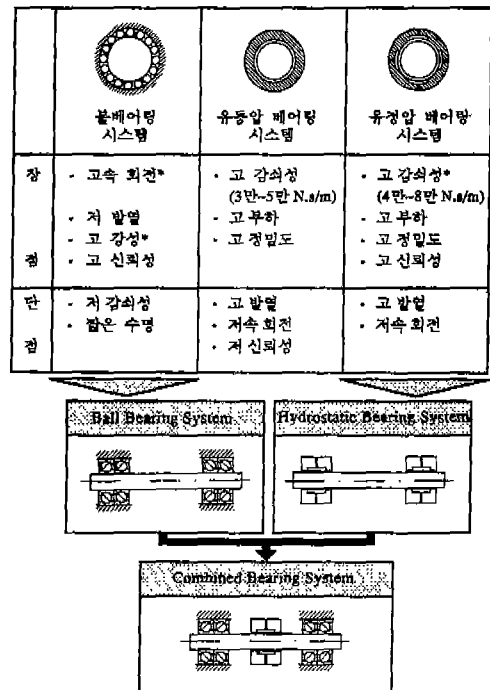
Configuration of a combined bearing arrangement spindle system.
